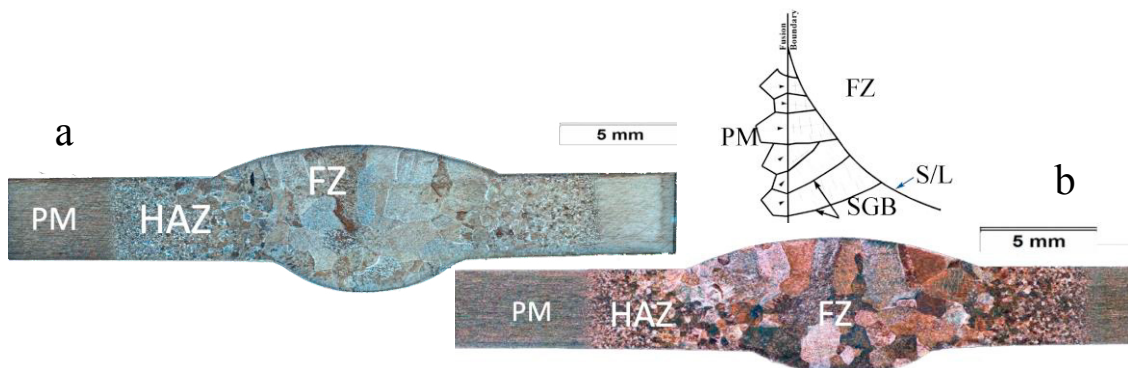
Macrographs of butt-welded joints after SR1 (a) and SQA1 (b) heat treatments
